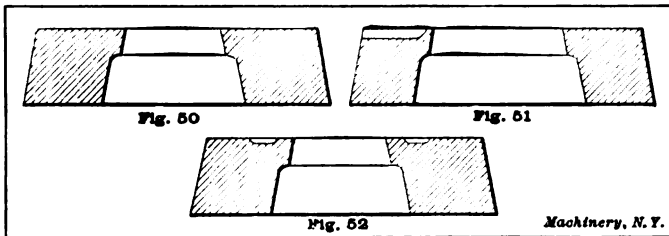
Section of Trimming Die to show the Clearance given to the Cutting Edge. Fig. 51. Section of Cold-trimmer to show Method of Cutting away a Space at the Front to clear Rough Sprues. Fig. 52. Section of Trimming Die to show Channel Cut around the Die-opening to accommodate Forgings that must be trimmed wrong-side up
